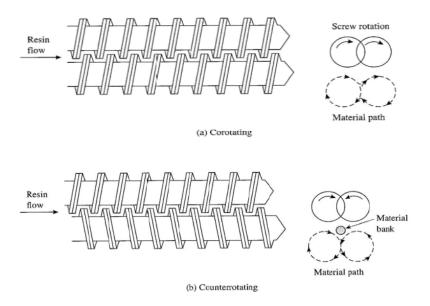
Intermeshing twin screw extruder (a) Co-rotating and (b) Counterrotating
